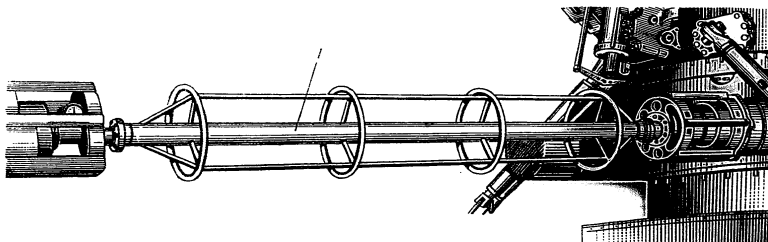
APPLIANCE FOR CHECKING MAIN GEAR BOX AND ENGINE SHANKS FOR AXIAL ALIGNMENT
